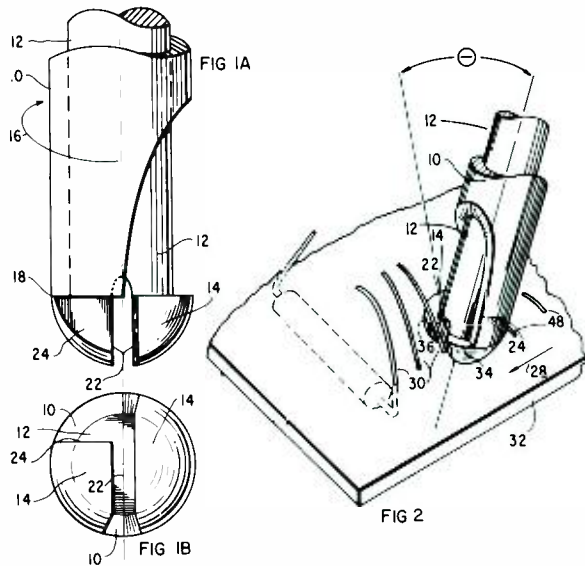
Cutter-clincher tool. Fig. 2 — Operation of cutter-clincher tool.
